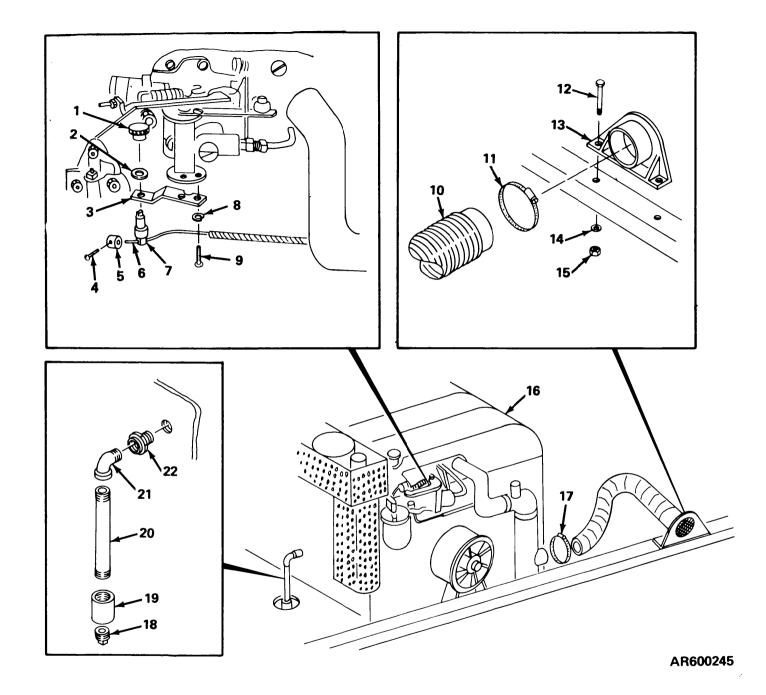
Throttle, air duct hose, and oil drain, exploded view.
